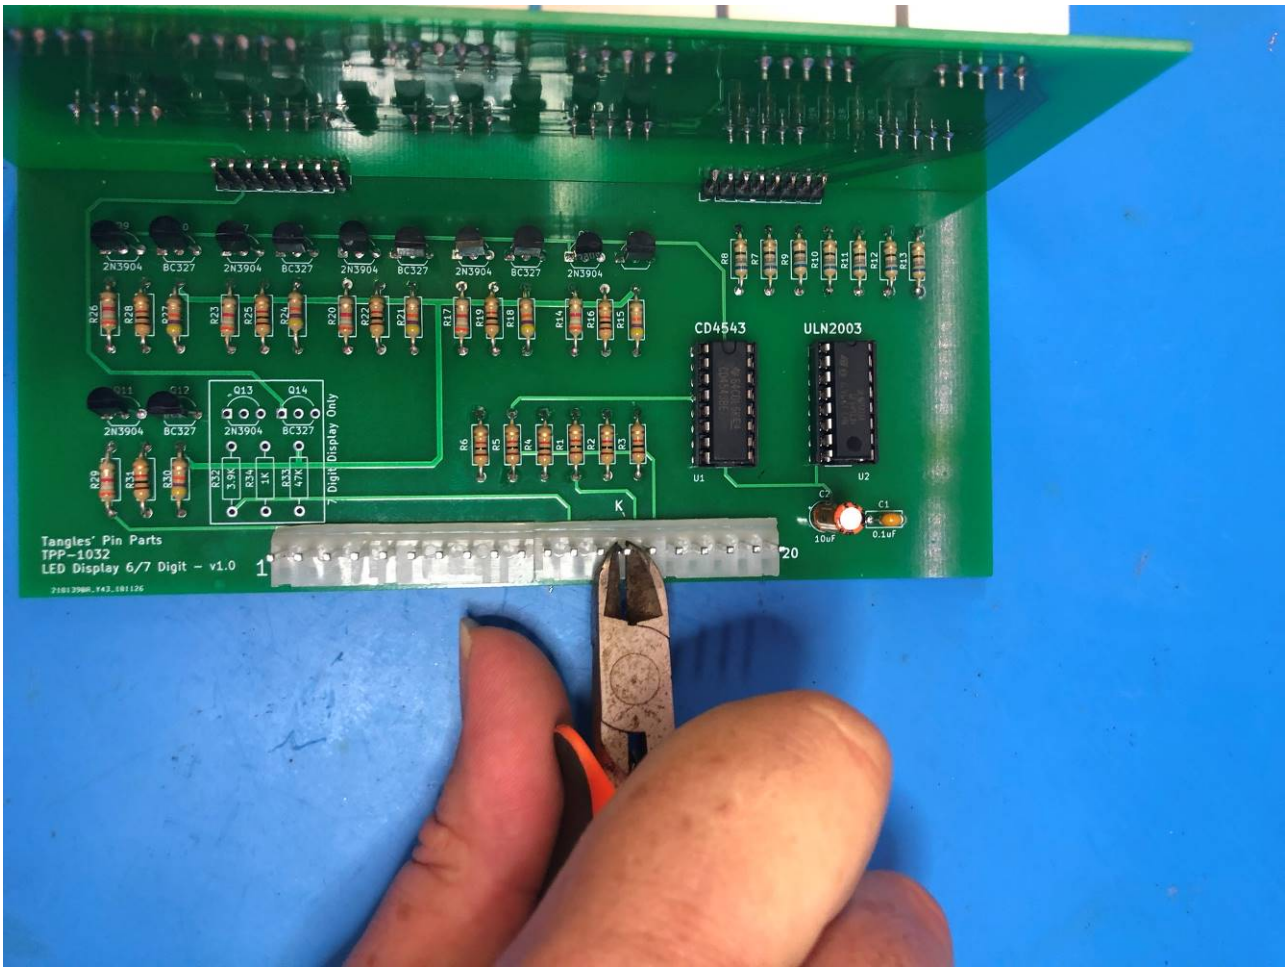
Cut the key pin. Take care of the flying cut pin. The Key pin is marked on the PCB with the letter "K"
